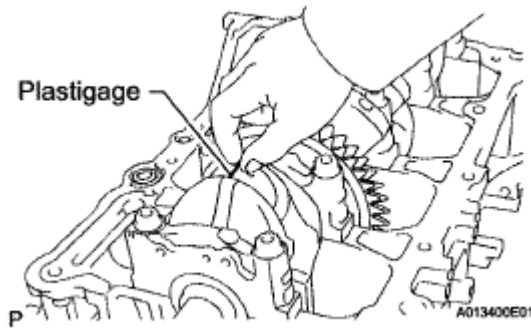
Laying Strip Of Plastigage On Crank Pin
